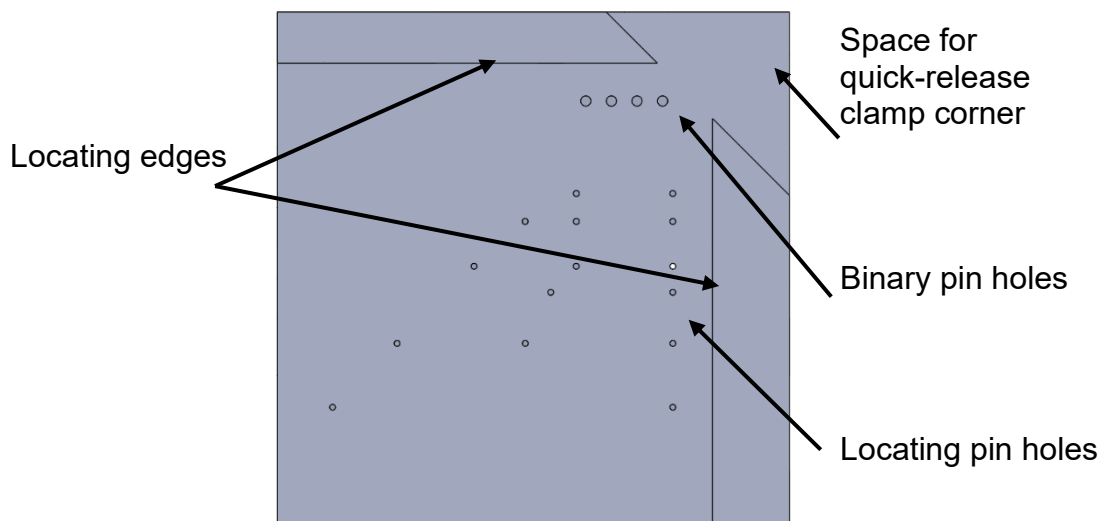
CAD representation of the top surface of optimised casting unit cooling block
